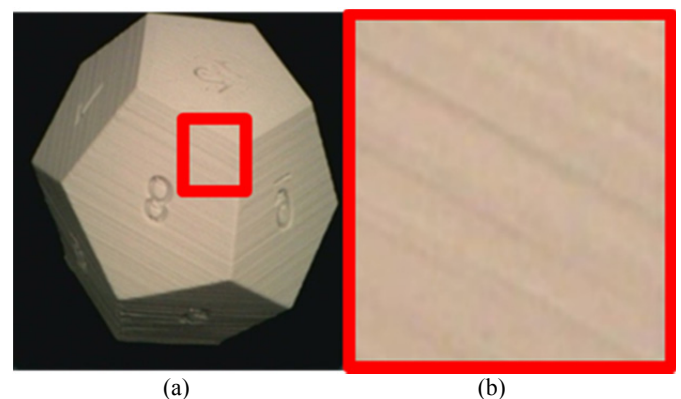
The sample of FDM products which has layer grooves ((a): Over all view of the FDM 3D printed products which has layer grooves, (b): Enlarged view of (a))
